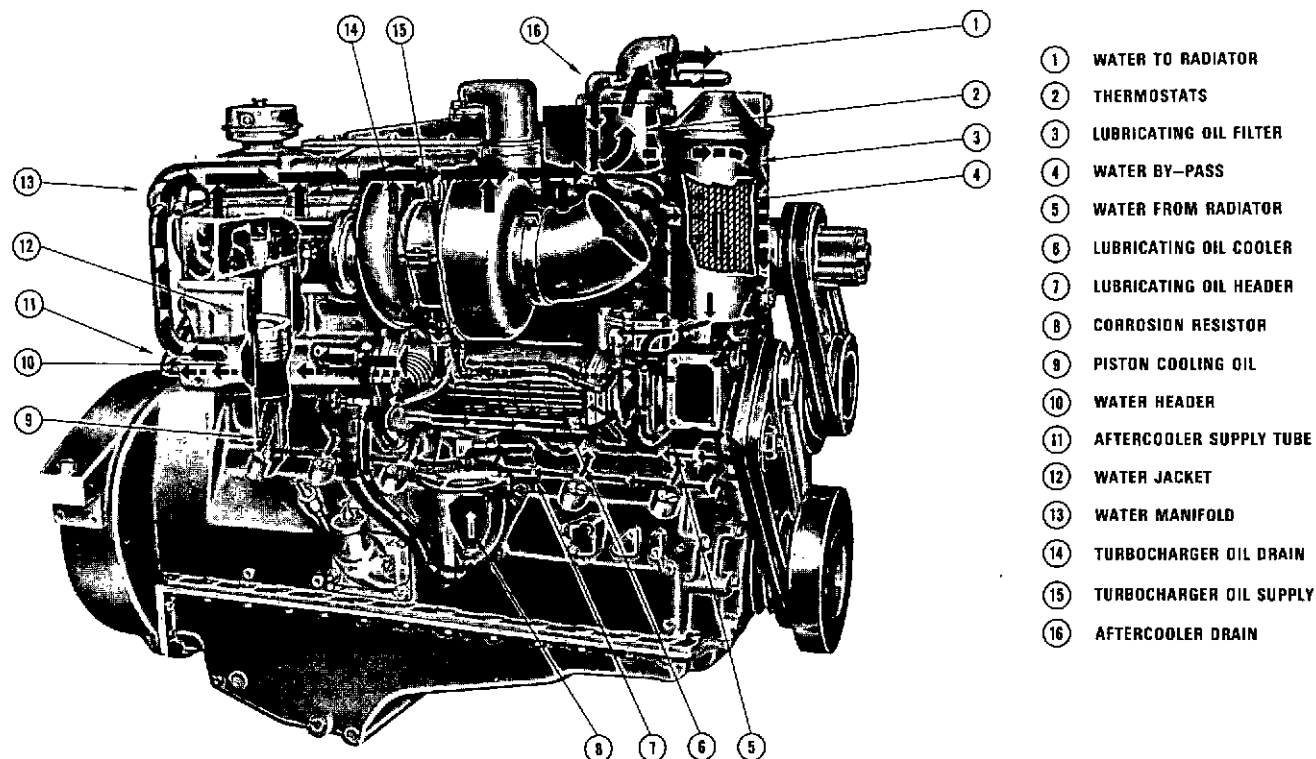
, LWC-21. Coolant and lubricating oil flow - NTA engine (exhaust manifold side)
